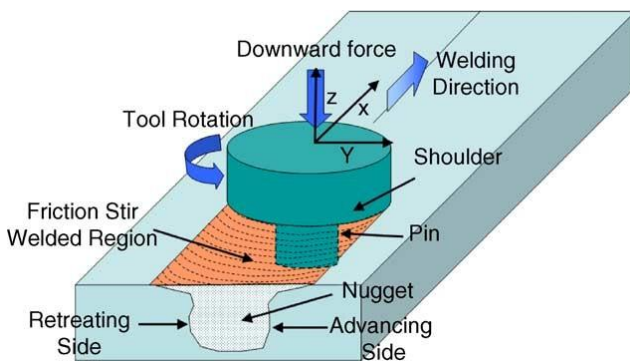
Friction Stir Welding Process [Mishra 2005]
